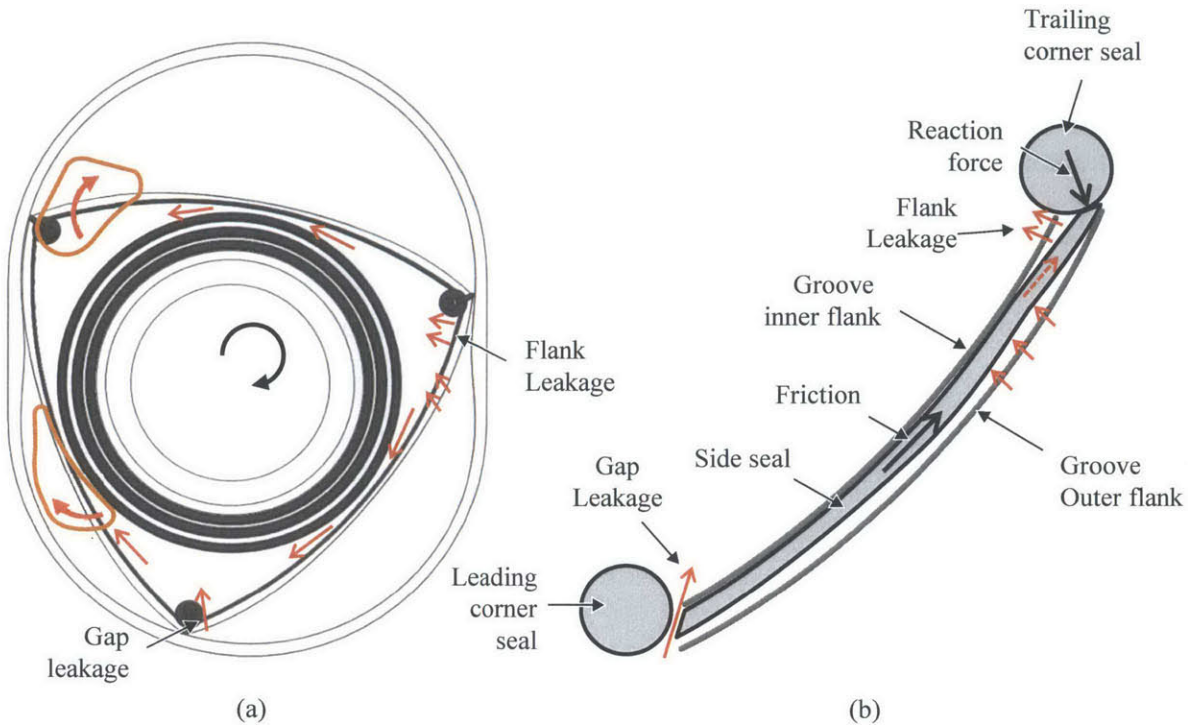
(a) Position of the side seal leakage for high pressure in the combustion chamber and (b) mechanisms leading to side seal leakage
